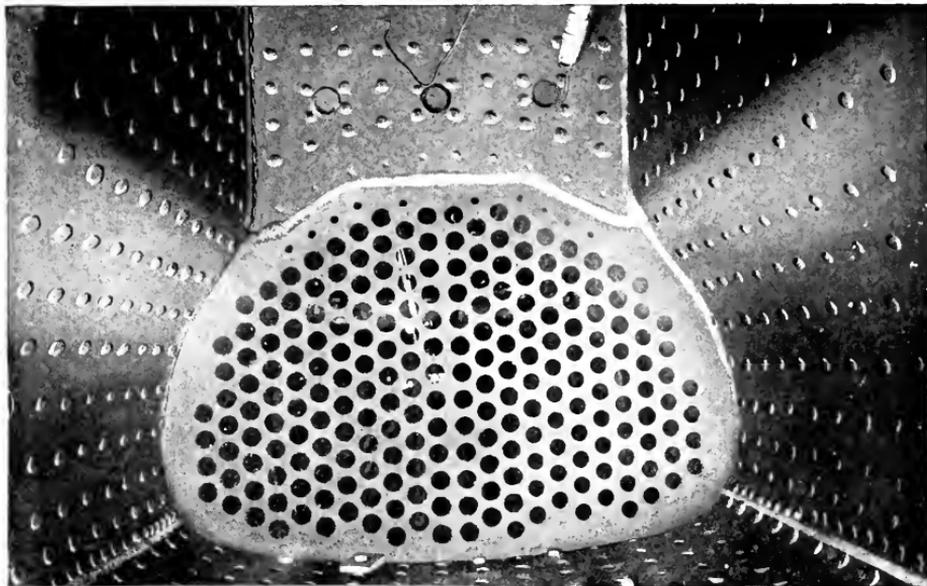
Interior of Locomotive Fire Box. Back Tube Sheet Welded by Arc Process
